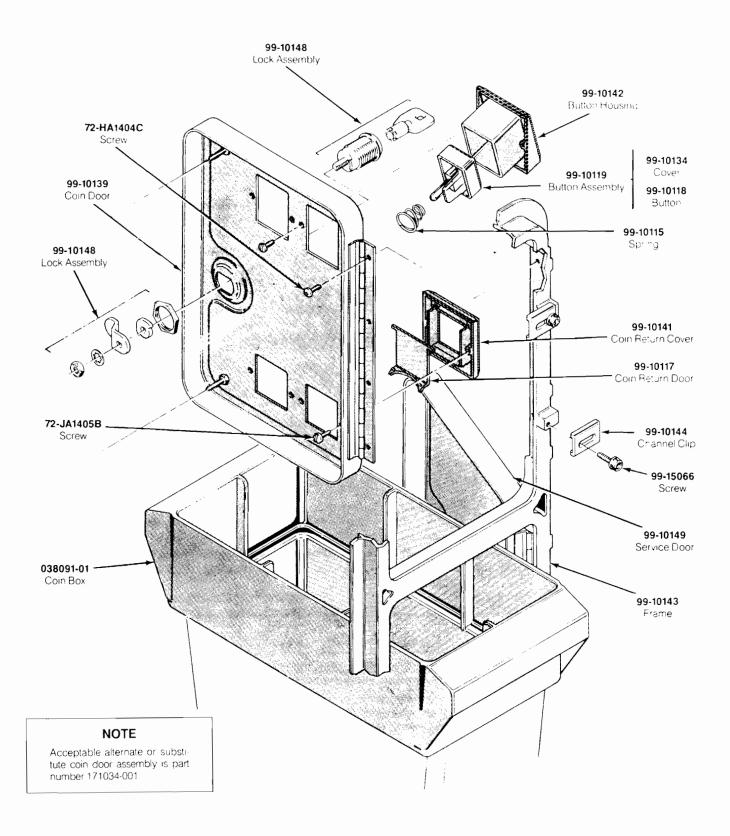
Coin Acceptors, Inc. Coin Door Assembly, Continued 171027-001 A
